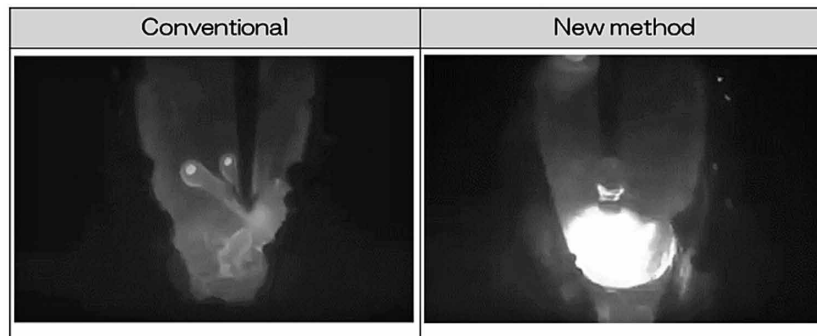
Observation of Metal droplet transfer in welding groove
